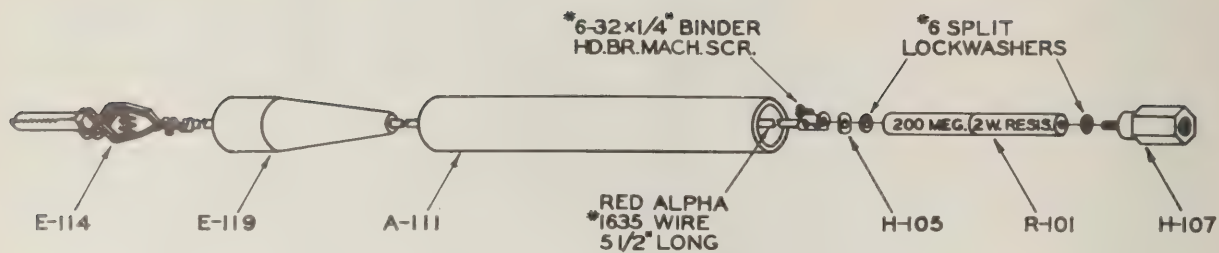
Exploded View of High Voltage DC Probe Extension E-109.
